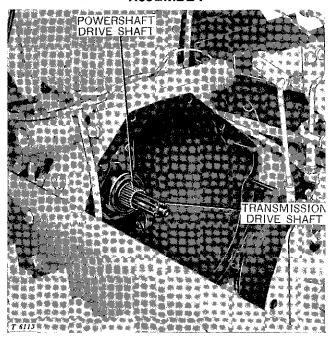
Transmission and Powershaft Drive Shaft Indexing Points (Constant Mesh Transmission)
